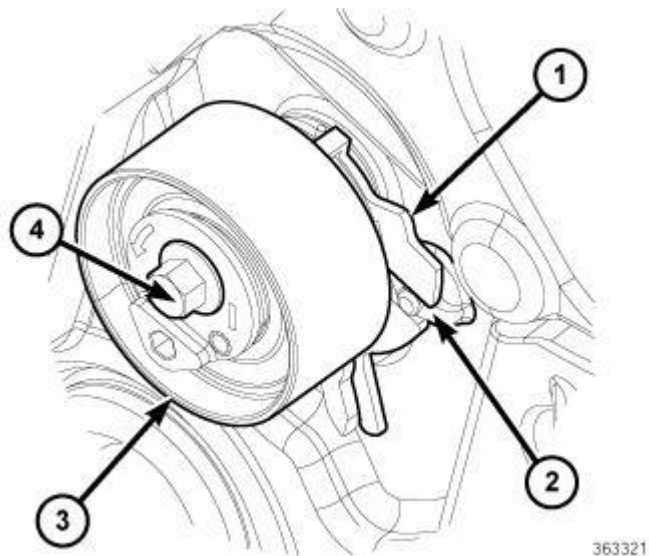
Tensioner Alignment Plate, Boss, Timing Belt Tensioner & Bolt
